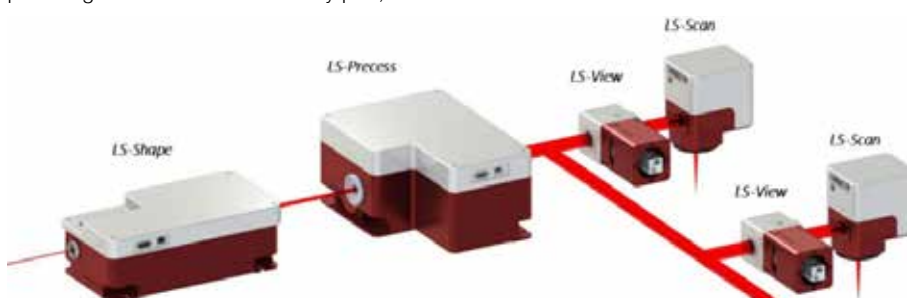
Representation of modules allowing a controllable precession movement in combination of two or more galvo heads.
